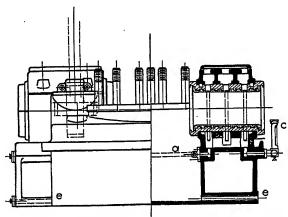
Bed Plate and Bearings for Single-cylinder Engine.
